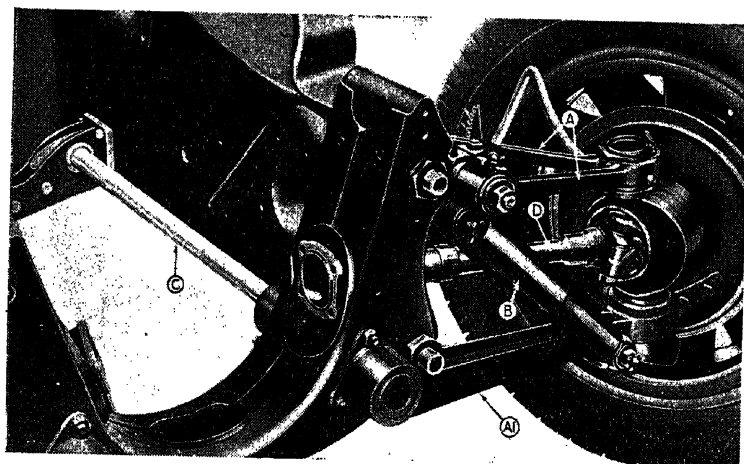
Citroen Springing System and Cardan Drive Shaft.
